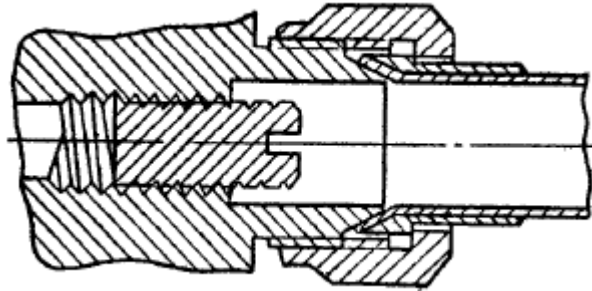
Throttling device with a screw and a fixed cutting profile
